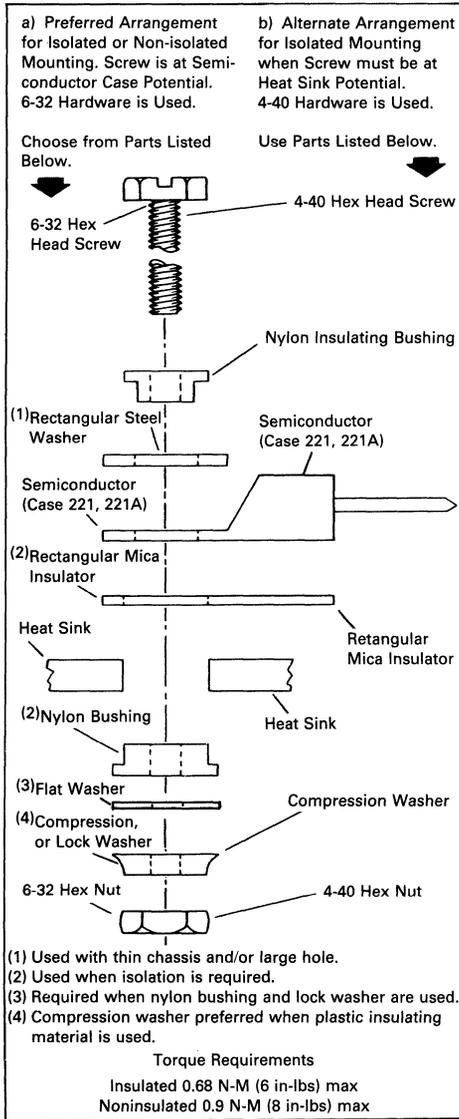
MOUNTING ARRANGEMENTS FOR THERMOWATT PACKAGES (TO-220)
